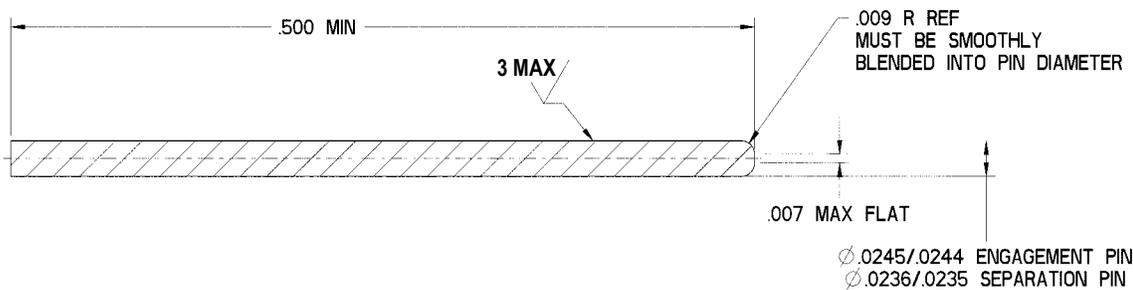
INNER SOCKET ENGAGEMENT AND SEPARATION TEST PIN DIMENSIONS
